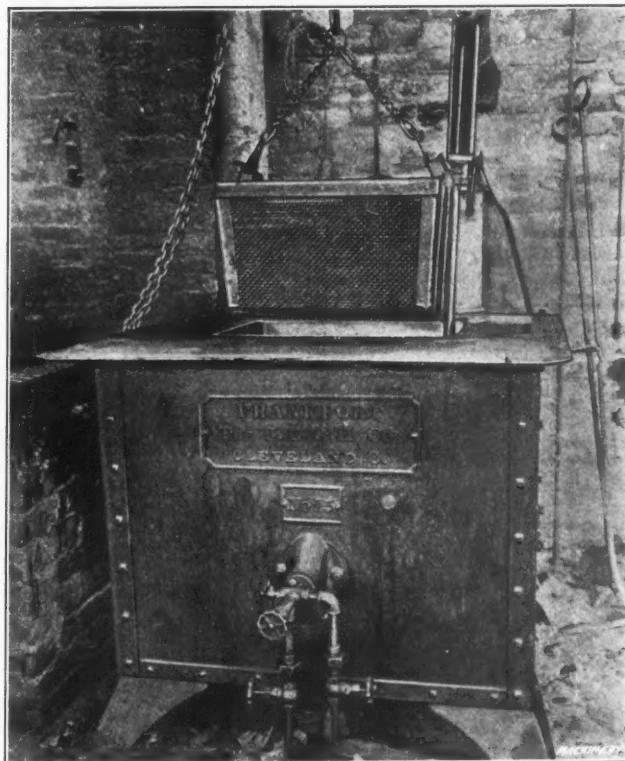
Oil Bath for Drawing the Temper after Hardening
